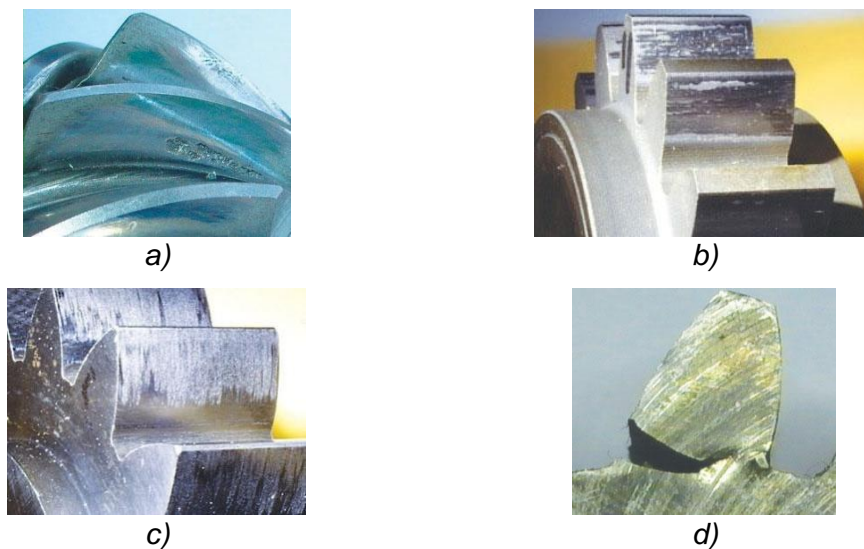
Typical gear failures: a) pitting, b) micropitting, c) scuffing, d) root crack. Reproduced from [105].
